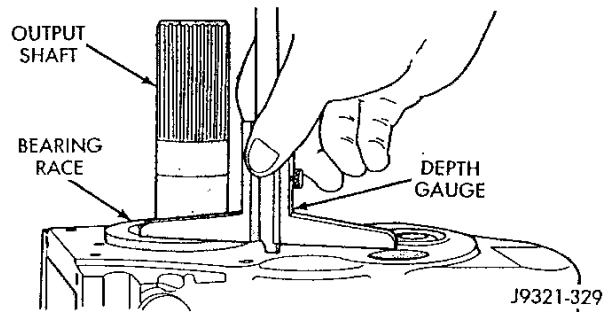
Measuring Height Of Output Shaft Rear Bearing Race
